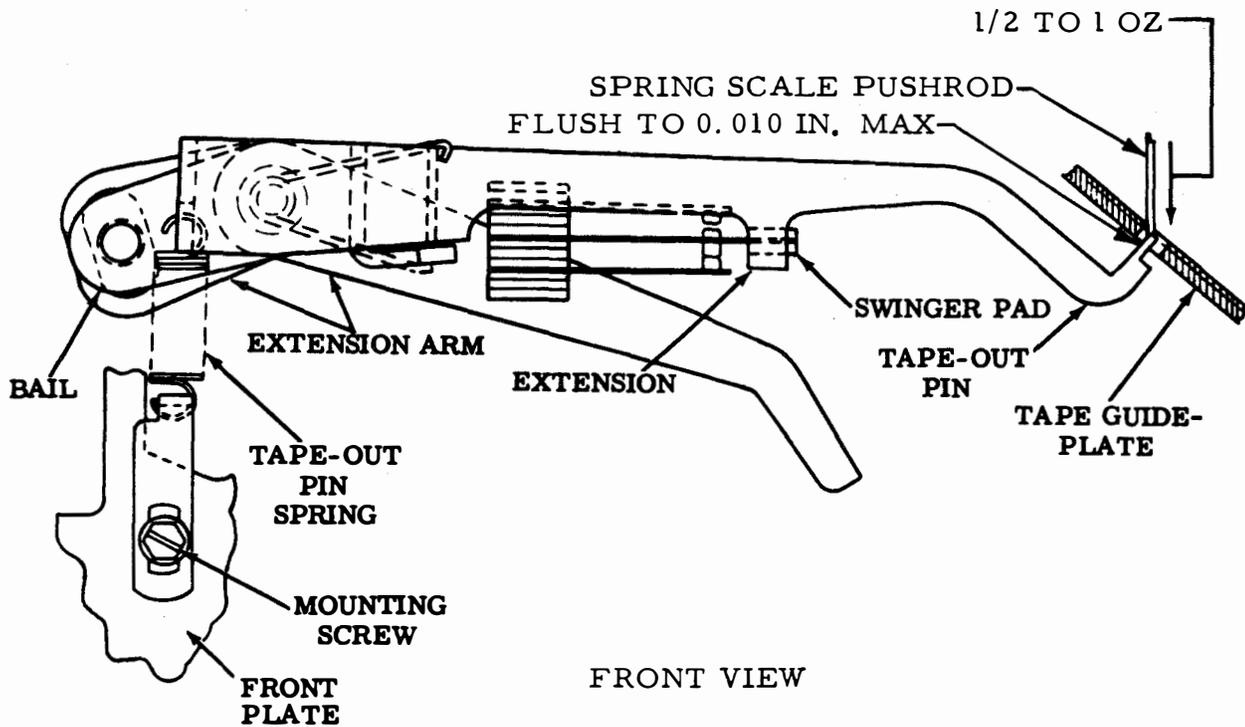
Tape-Out Pin Spring and Tape-Out Pin
